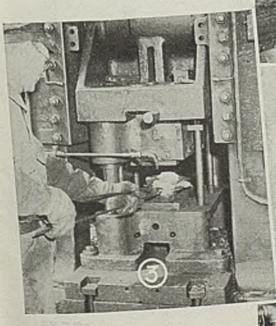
Pair of connecting rods in third position of 2000-ton press die. Forging first passes through edging and blocking operations in cavities at left of die
